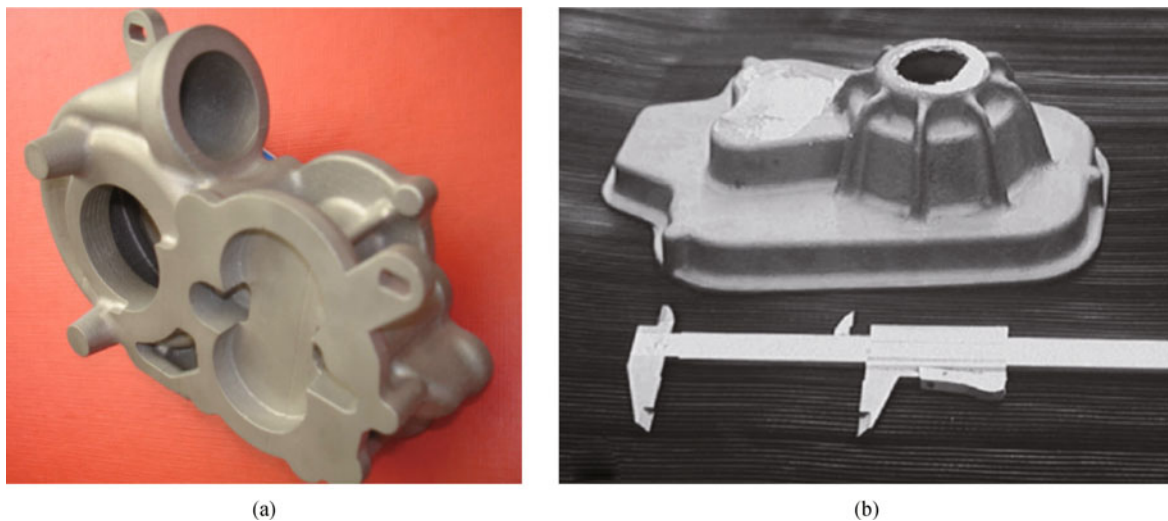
(a) Water pump for a motorsports car produced by SLM (Source: [152]); (b) automotive part produced by investment casting with 3D-printed starch patterns and molds (Source: [154])
